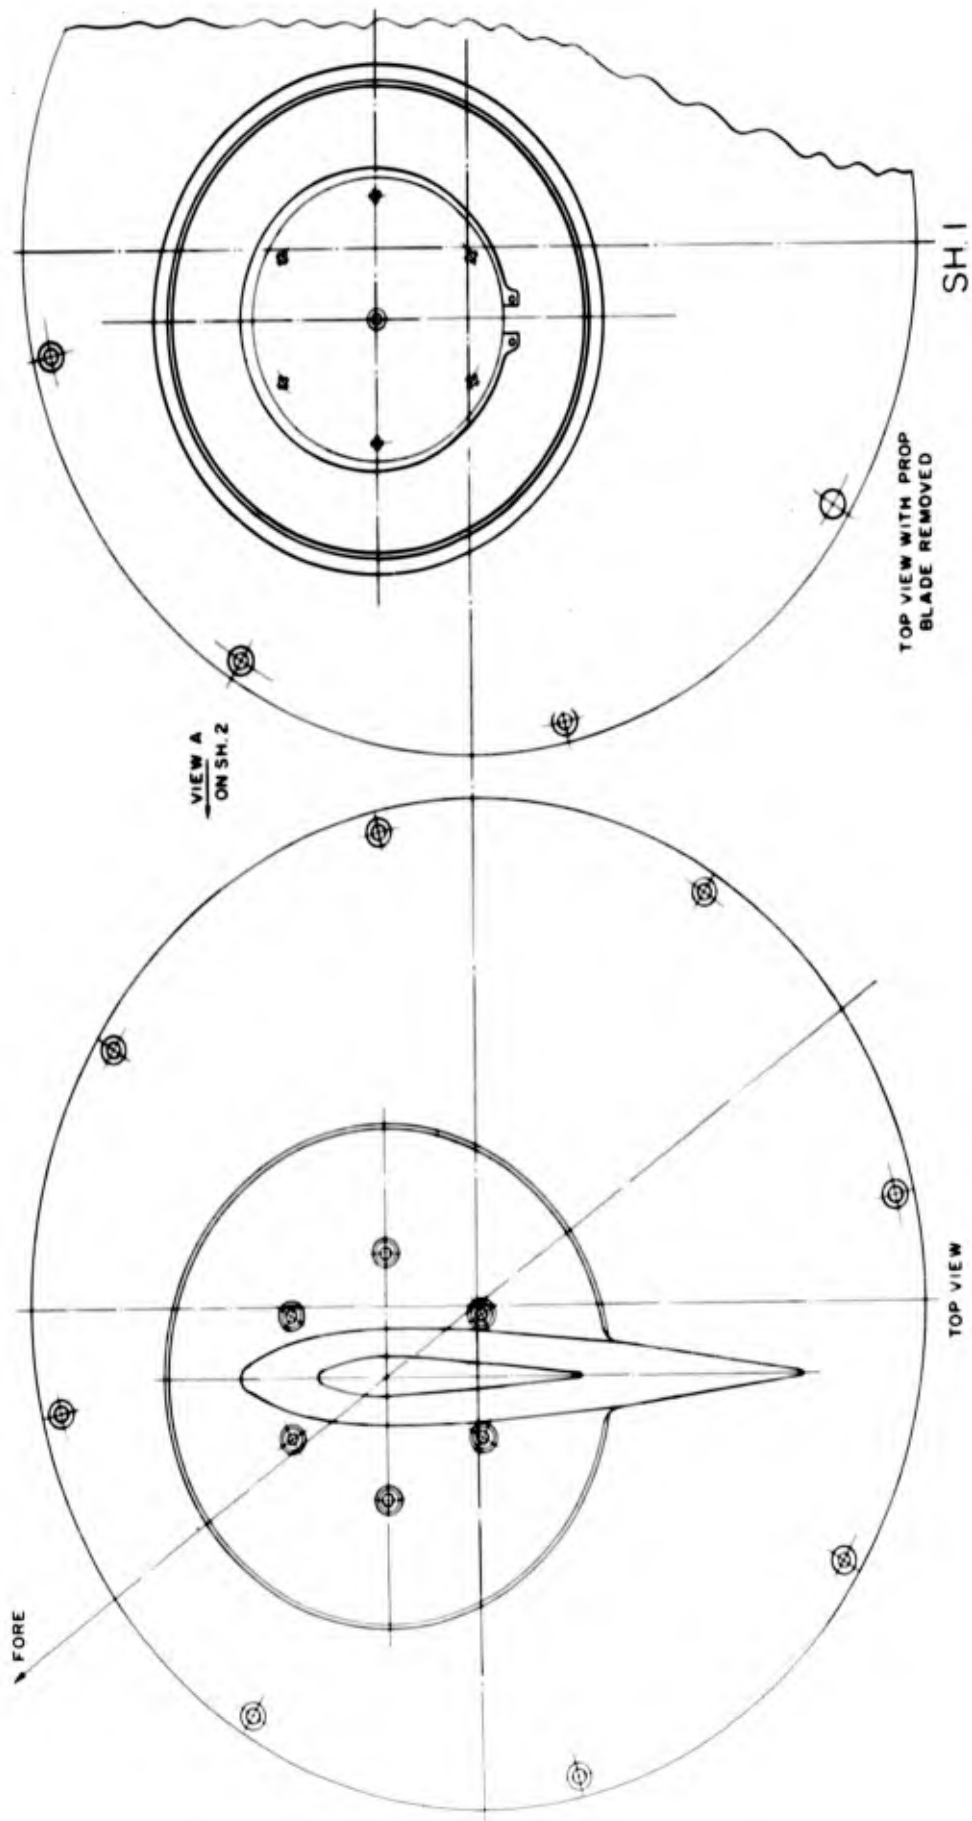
GENERAL ELECTRIC Propeller Blade and Actuator, Plan View
